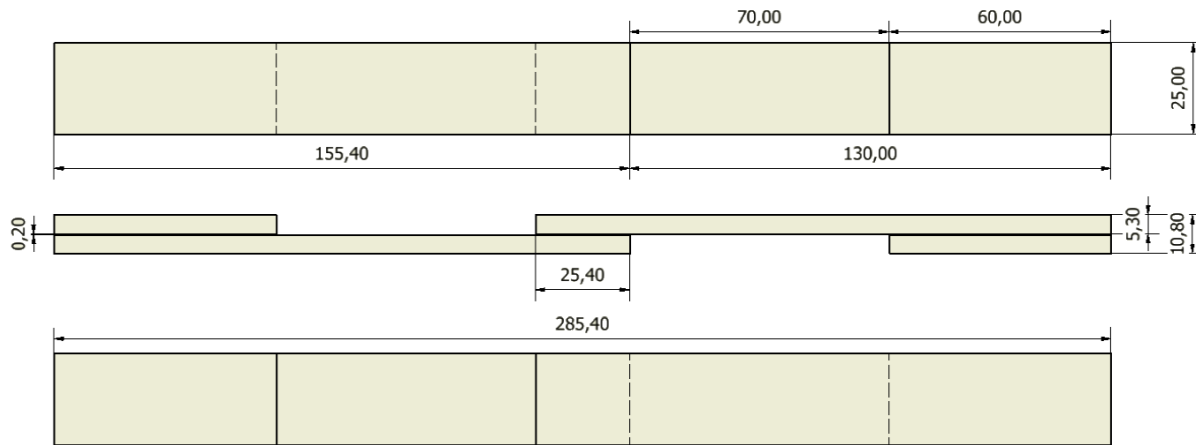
Single lap CFRP-CFRP specimen shape and dimensions
